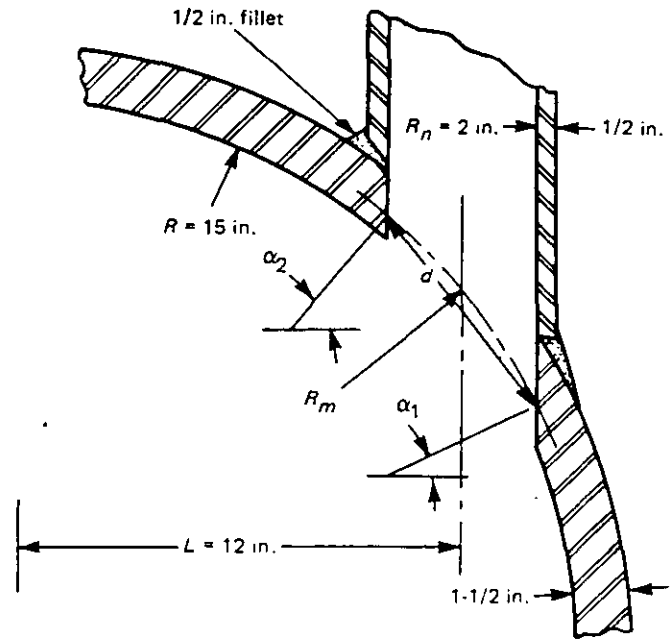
EXAMPLE OF REINFORCED OPENING
